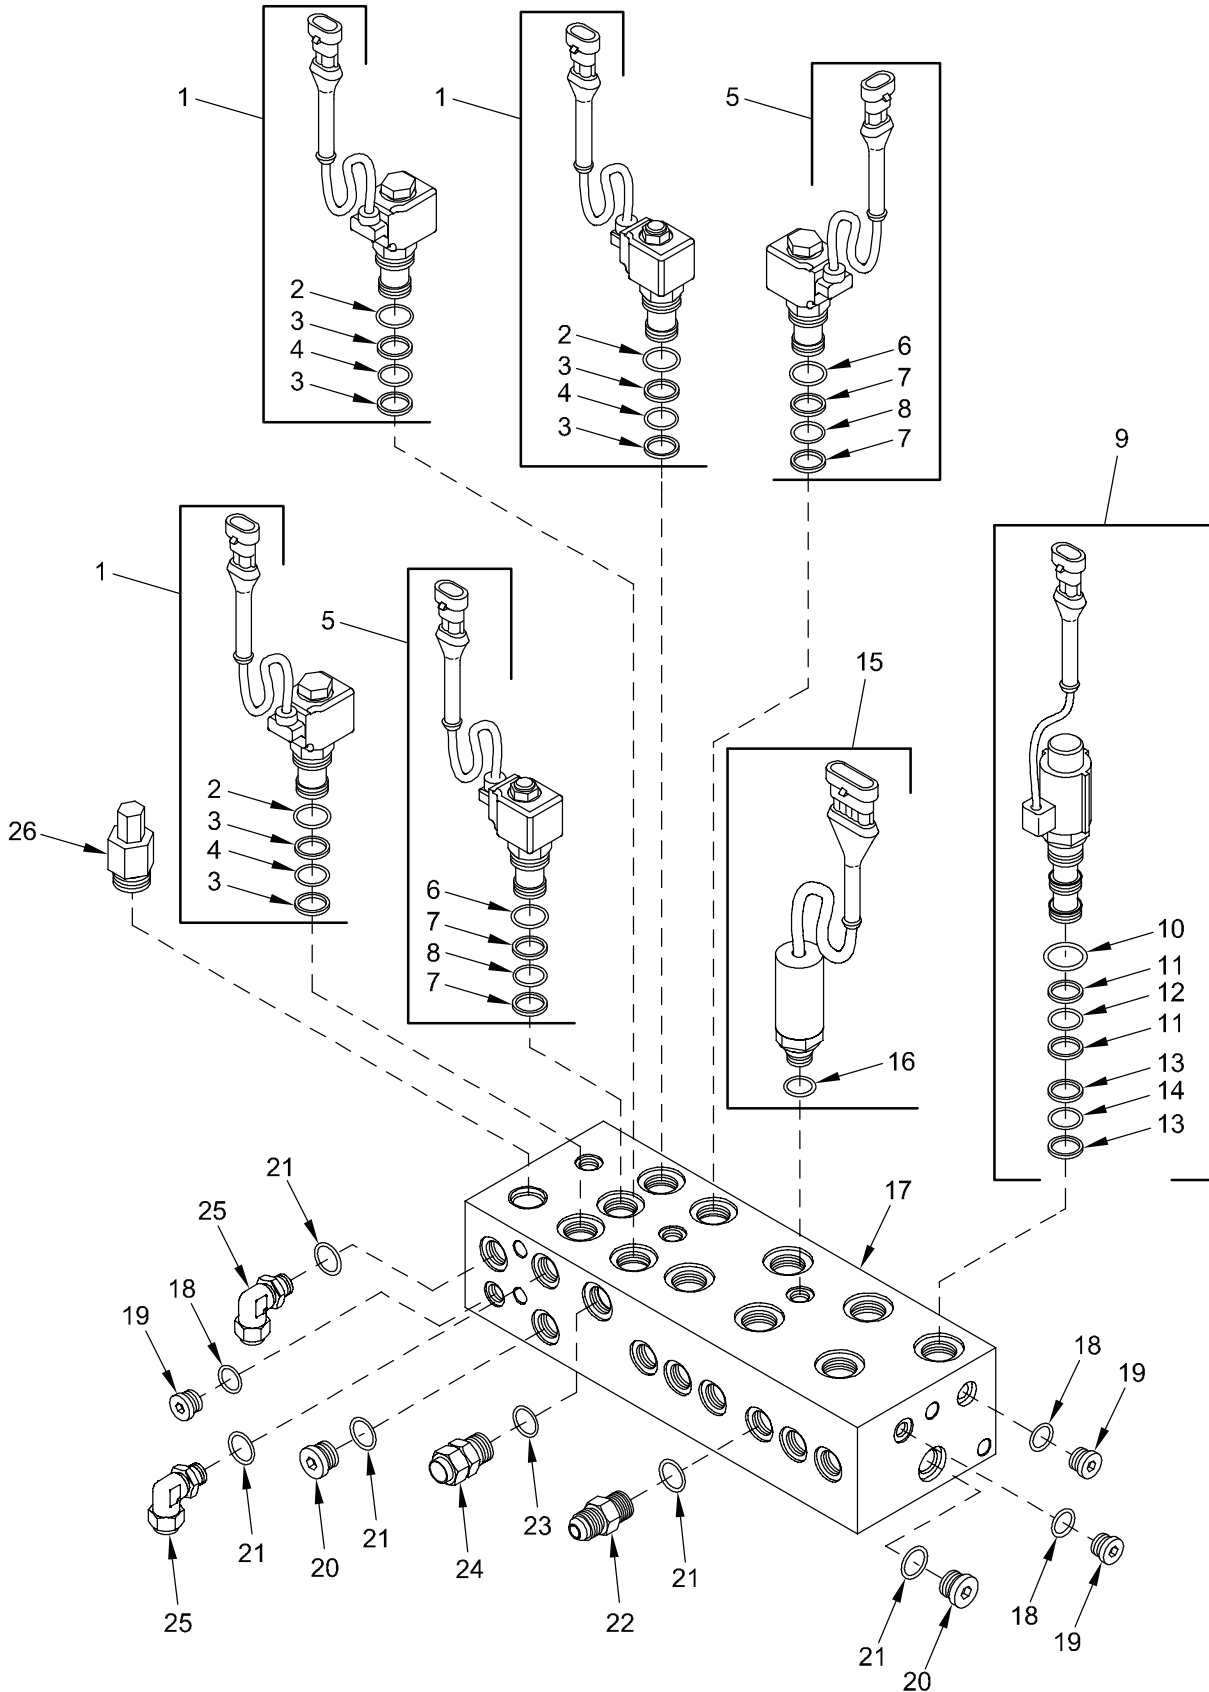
Primary Manifold Assembly (Sheet 1 of 2)
